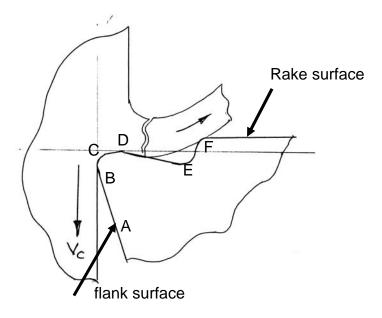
Schematic view of the typical form of inserts (cutting edge) with integrated chip-breaker.
